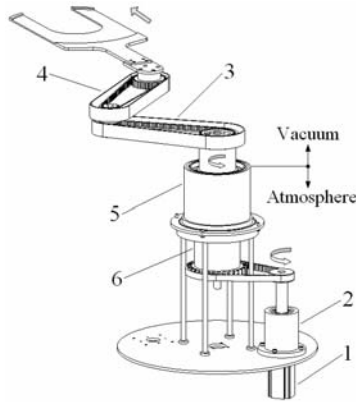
Descriptive diagram for R movement of wafer-handling robot: 1- AC servomotor of outer shaft; 2- Harmonic reducer of outer shaft; 3- Back arm; 4- Forearm; 5- Coaxial twin-shaft magnetic fluid rotary seals; 6- Outer shaft
